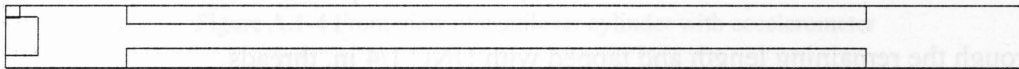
Sectional view of silicon rubber cylinder after machining
